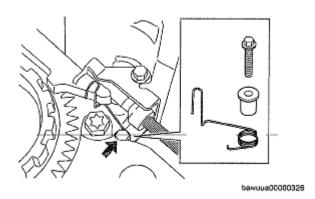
Identifying Pawl Return Spring And Parking Pawl Shaft Courtesy of MAZDA MOTORS CORP.
